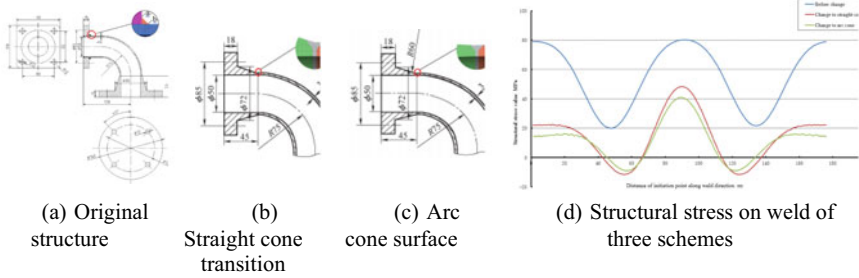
Fatigue test of specimens weld details after modification and structural stress before and after modification
